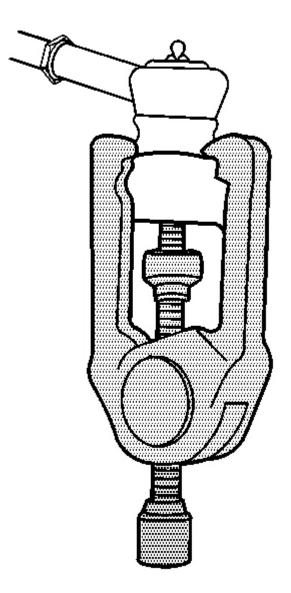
View Of Outer Tie Rod Assembly & J 24319-B Courtesy of GENERAL MOTORS CORP.
